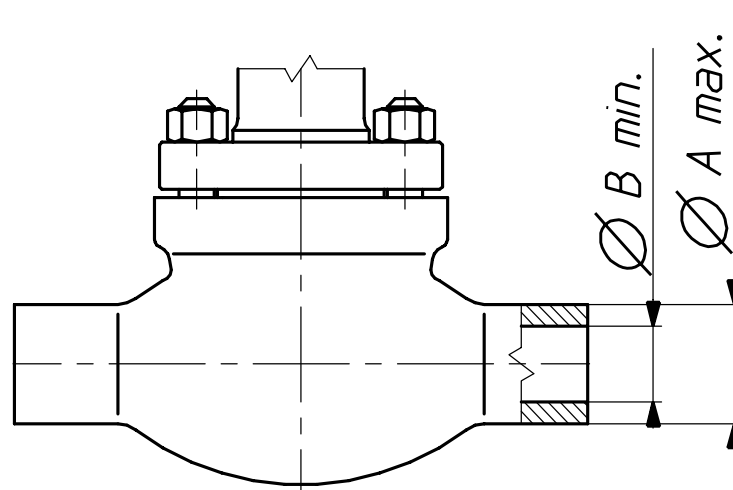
Dimension of butt welding ends executed as cast
